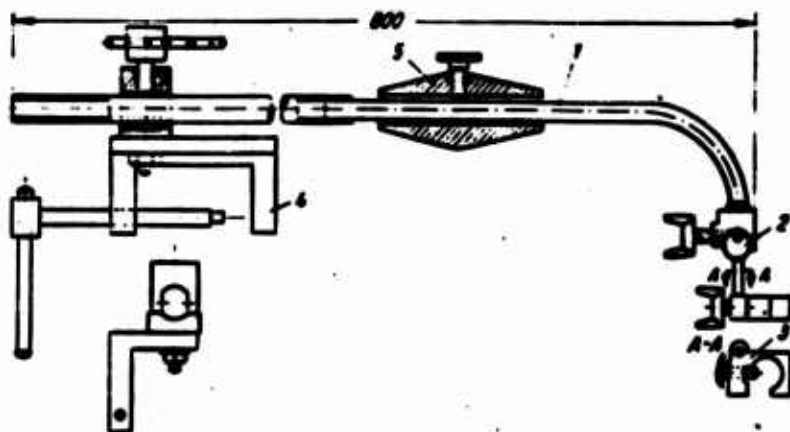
Attachment for clamping the searcher head to surface of checked rotor [245]: 1 - lever; 2 - ball joint; 3 - clamp for searcher head; 4 - clamp for fastening attachment to support of machine; 5 - moving load, regulating clamping force of head.
